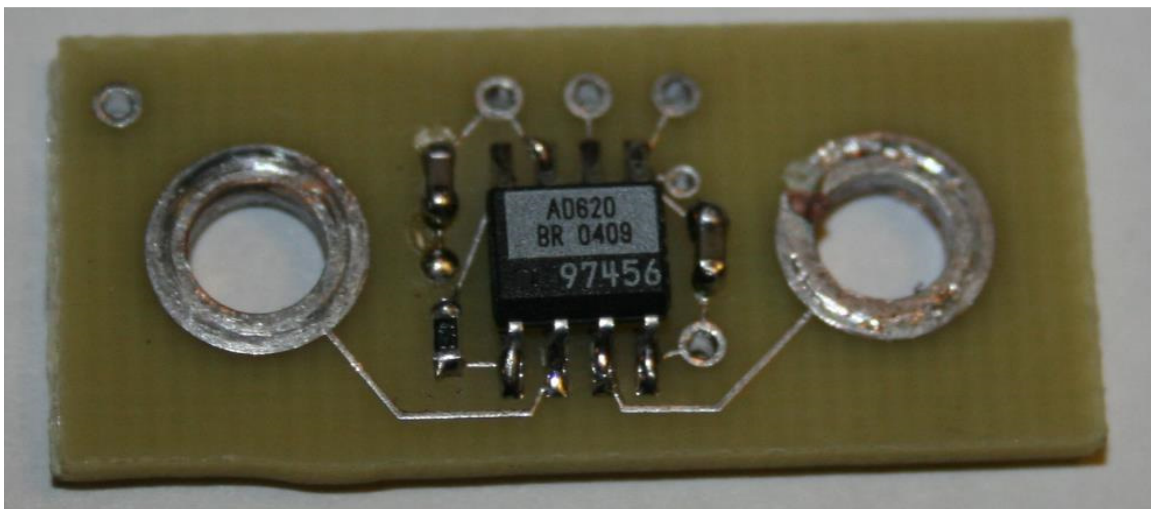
5. PCB with resistor, capacitors and AD 620
